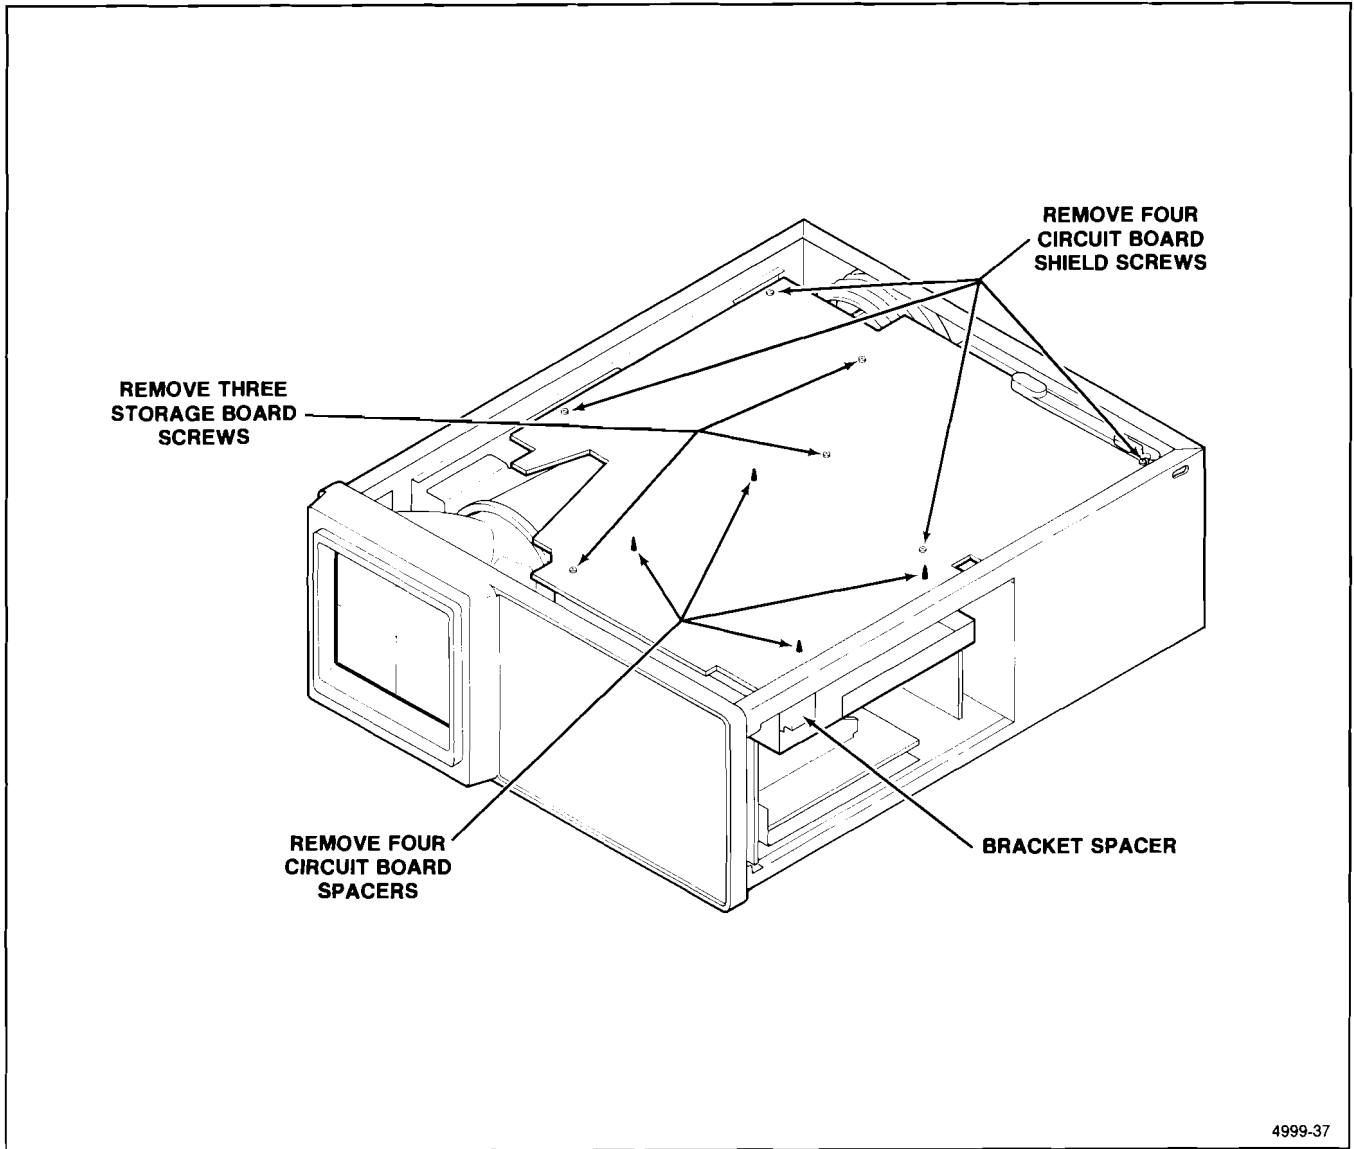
Location of screws and spacers on the Storage circuit board.
